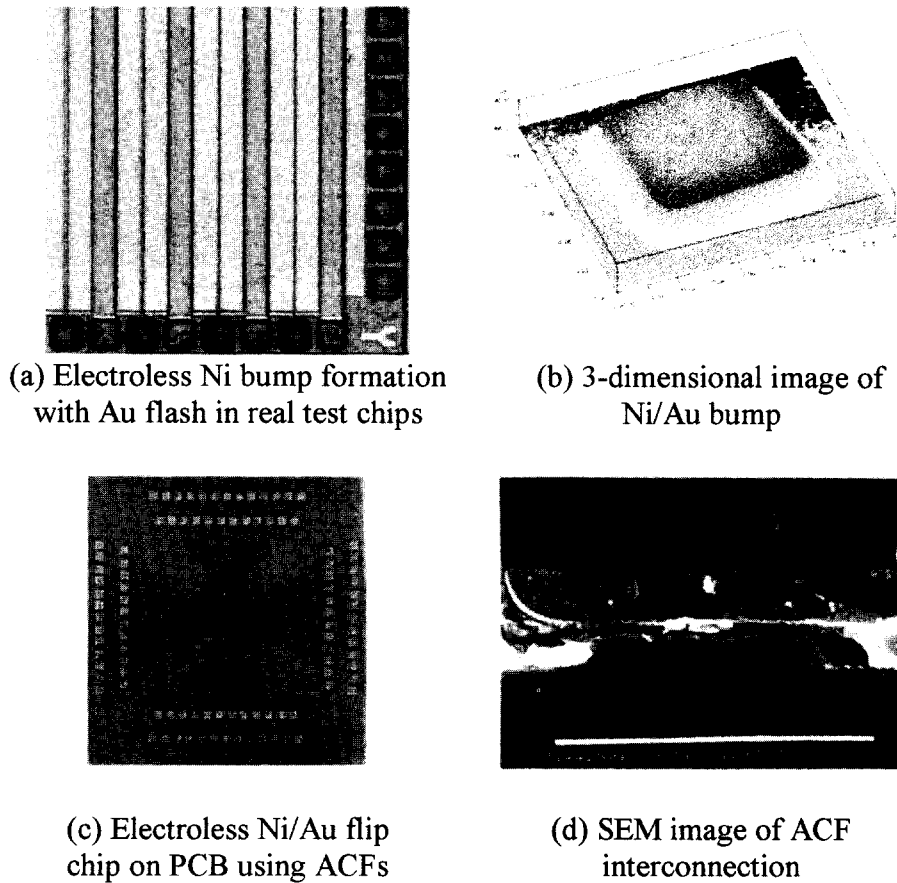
ACF flip-chip interconnection on PCB using electroless Ni/Au bumps.
